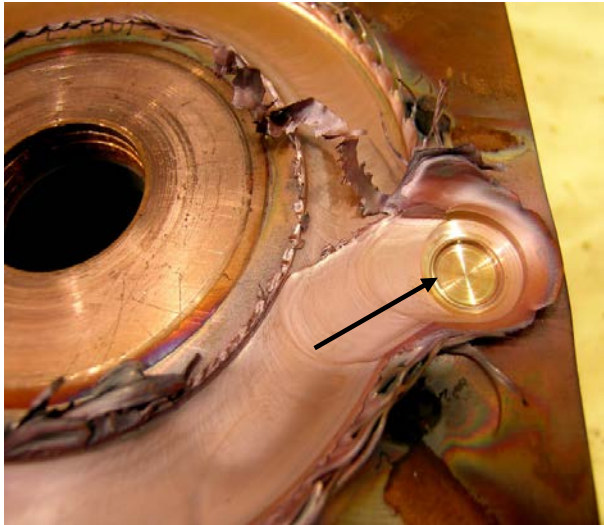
The shallow exit hole (arrow) is evidence at the end of the weld that the probe tip of the FSW tool has failed during the weld
